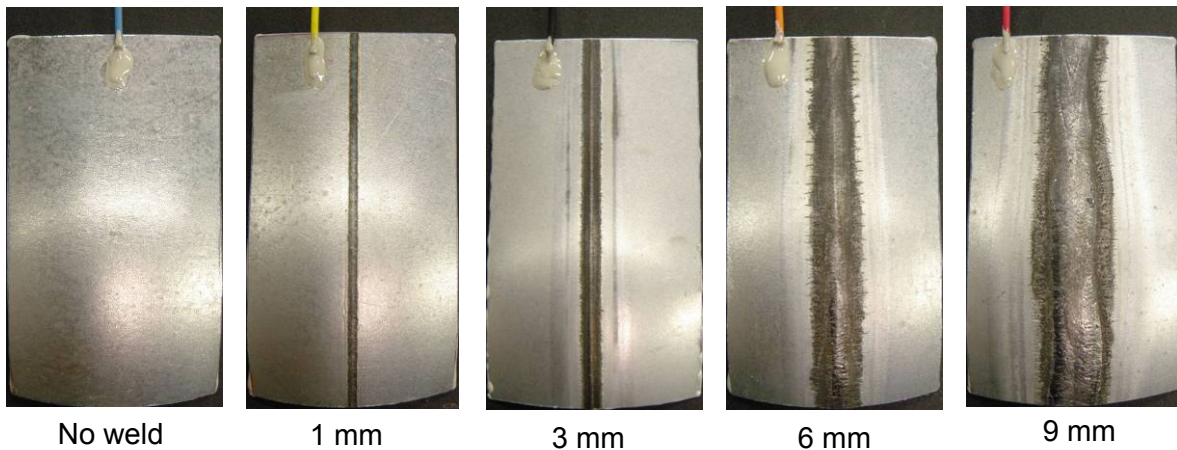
Prepared coupons after laser welding and stretch forming
